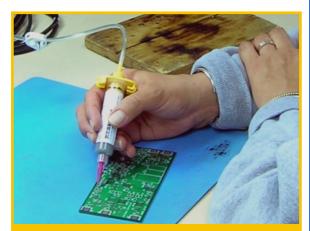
A closer view of the solder paste syringe. Air pressure deposits extremely small drops of paste of uniform size.
